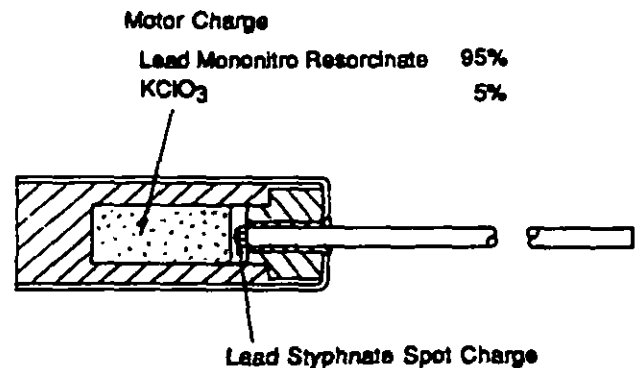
Piston Actuator Used in M762 Fuze (Ref. 4)
